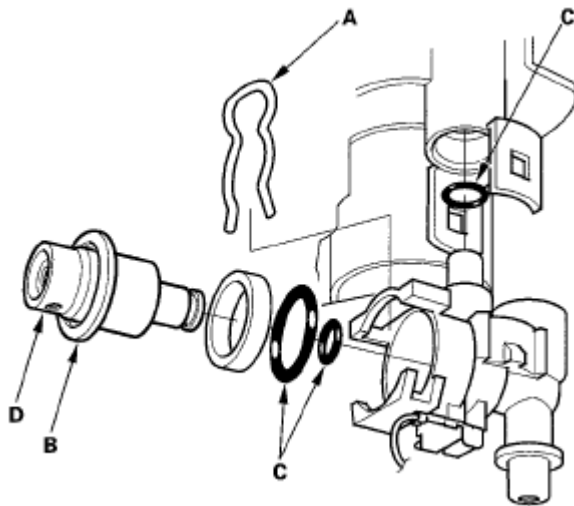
Identifying Fuel Pressure Regulator, O-Ring, Drain Hole And Clip
